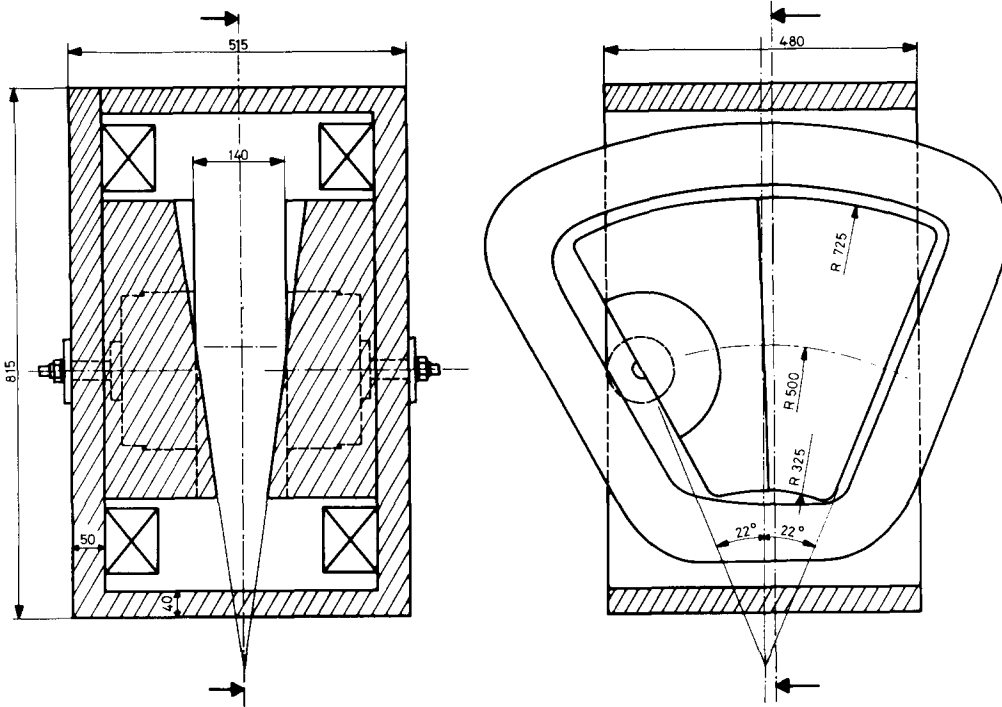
Dimensions of the 1st magnet of BILL (in mm).
